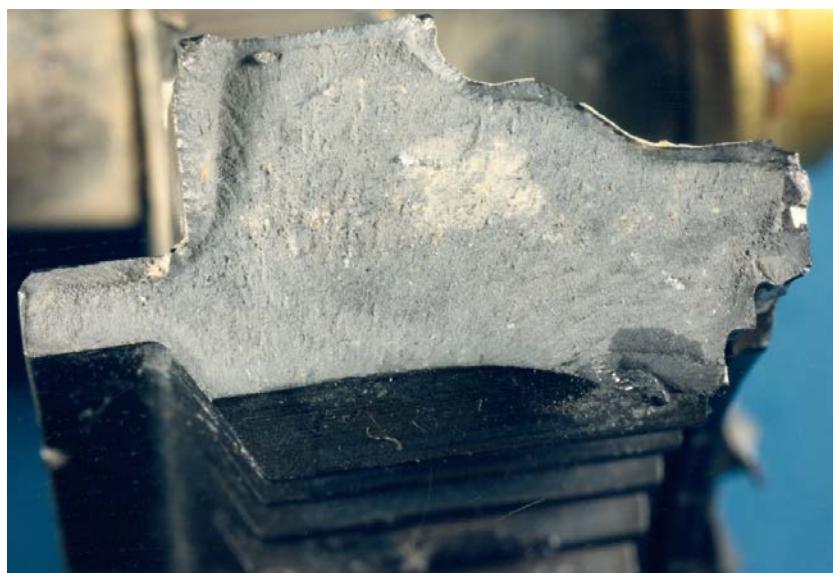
Typical Fracture Surface of Transmission Ring Gear.
